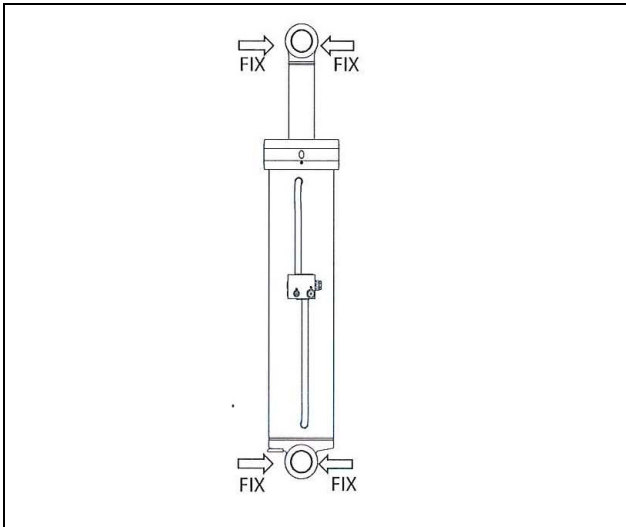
Fixing the Cylinder (Main Boom Lift Cylinder)
